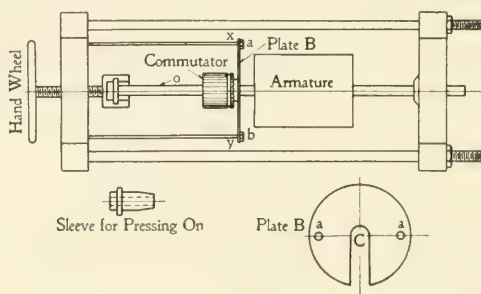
HAND PRESS FOR PRESSING COMMUTATORS ON SHAFT AND FOR REMOVING COMMUTATORS. SLEEVE FOR PRESSING ON AND PLATE USED IN REMOVING
